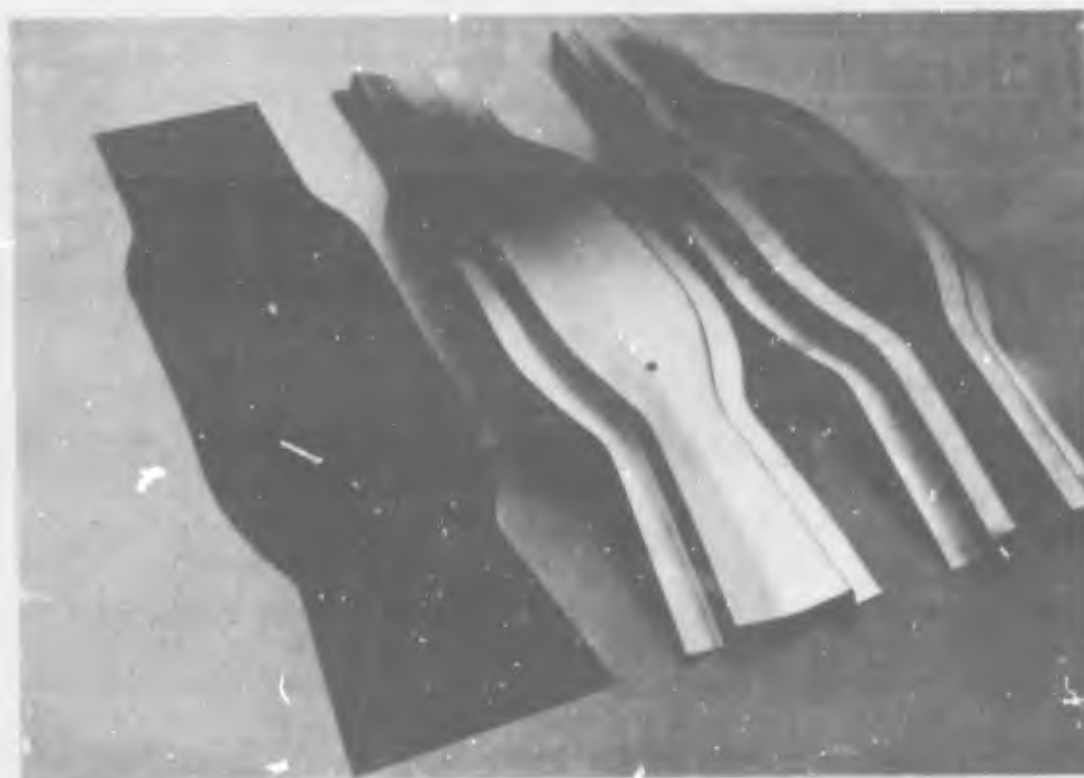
Flat Blank, Formed Zee Part Left and Right-Hand Details
